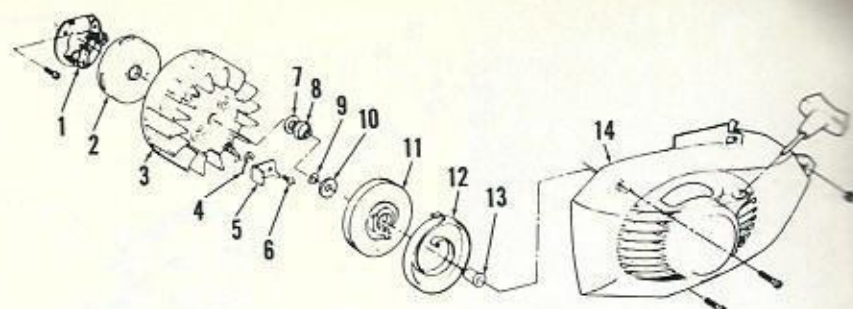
Exploded view of ignition and rewind starter used on models 944, 947, 1610 and 1612.
